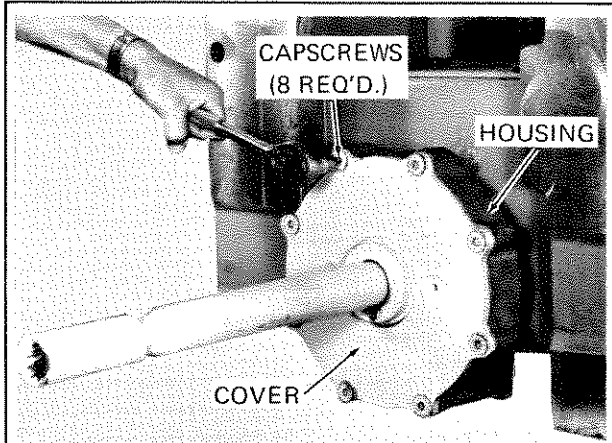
Installation of PTO Shaft Assembly — Lo-Speed (Sheet 3 of 4)
